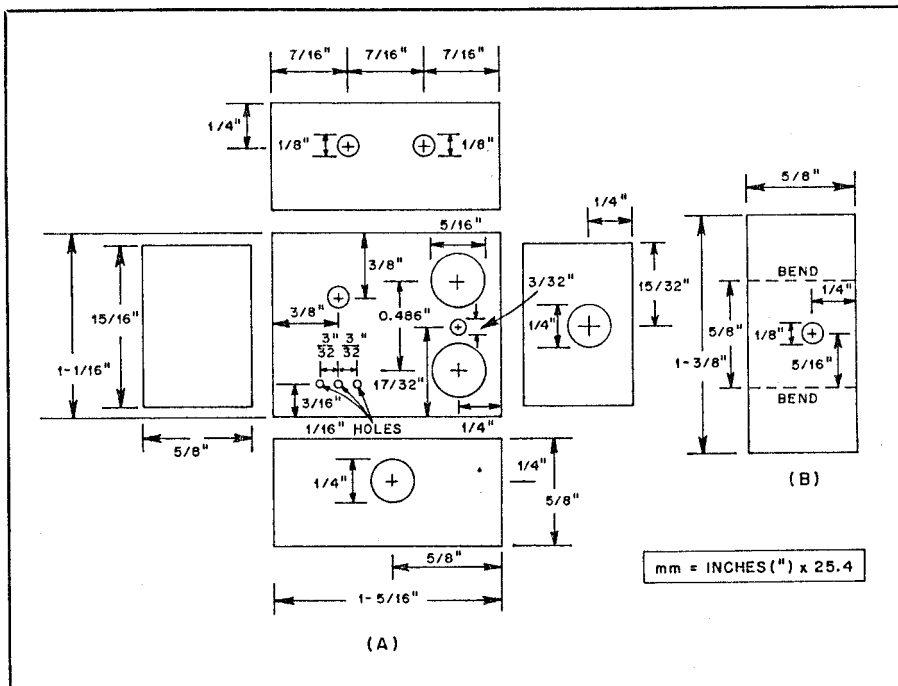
The five pieces of circuit-board material used to form the box are cut and drilled as shown in A before the box is assembled. The heat sink, B, is made from 1/16-inch aluminum or brass.
